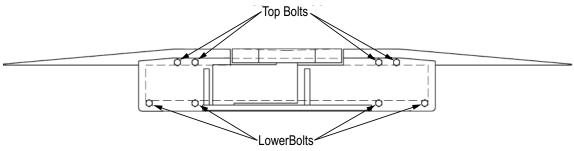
Top and Lower Bolts of Scale Mounting Bracket
